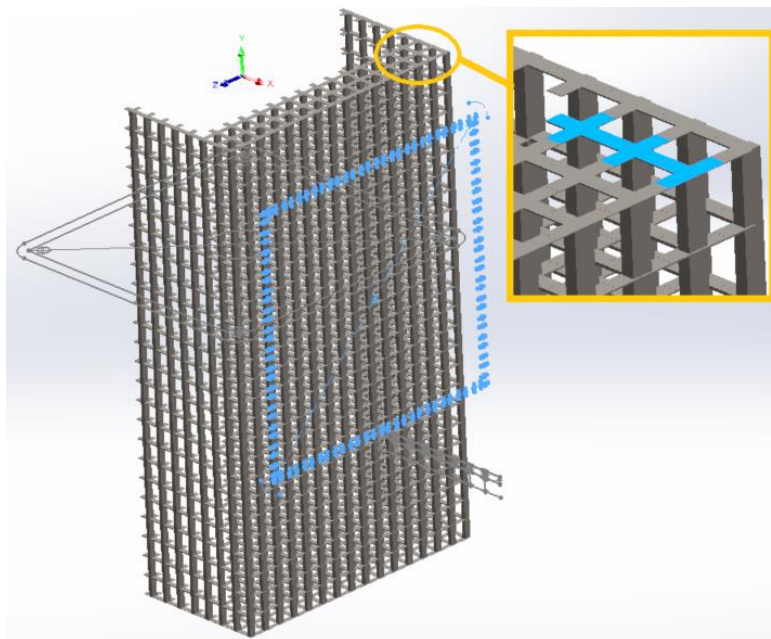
Arm Intersection Set-up w/(x3)-Beams
